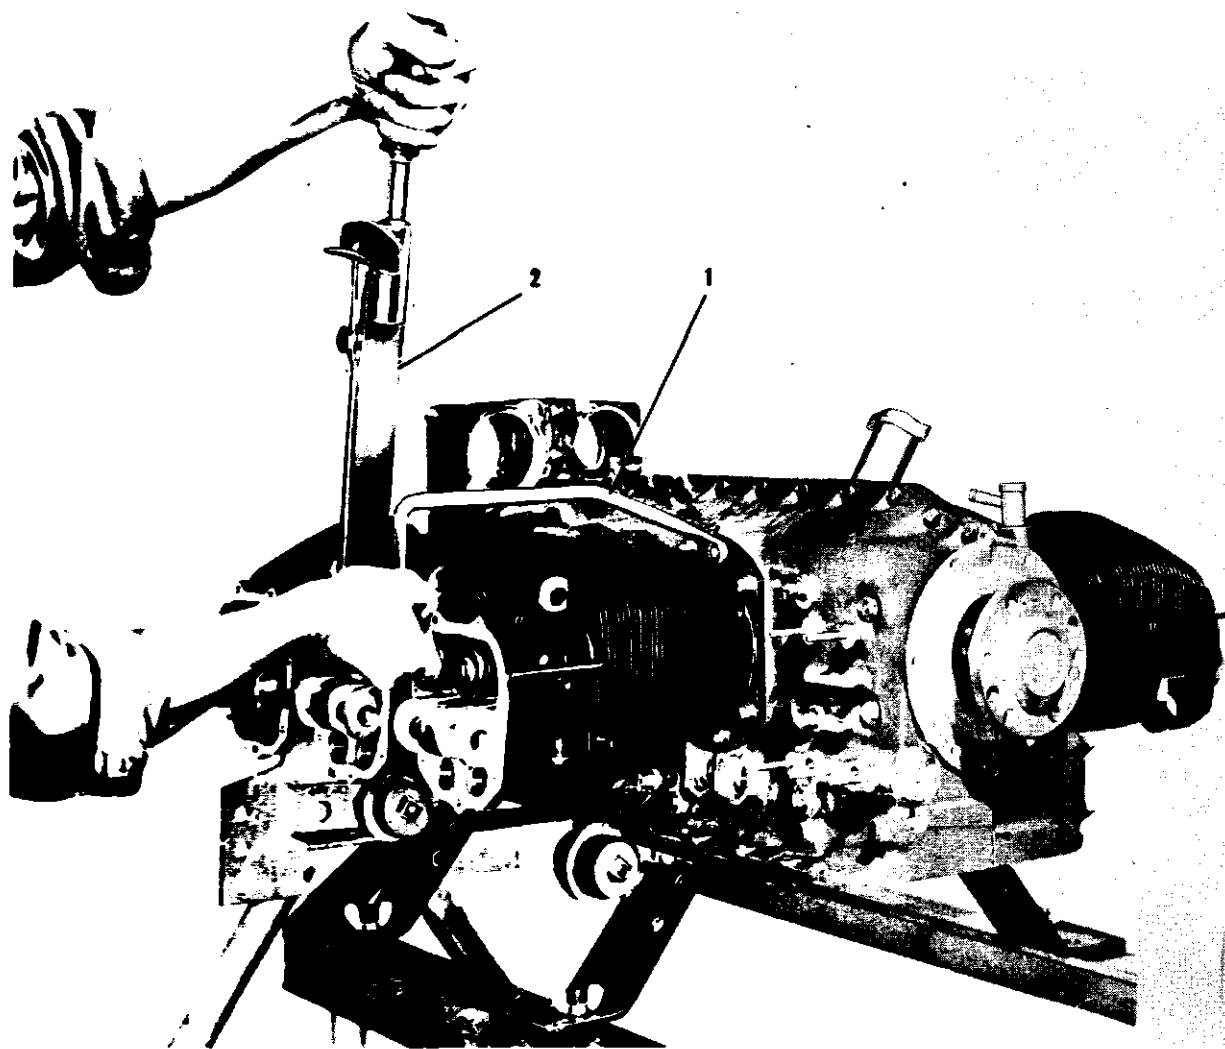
Installing No. 5 Cylinder and Piston Assembly
